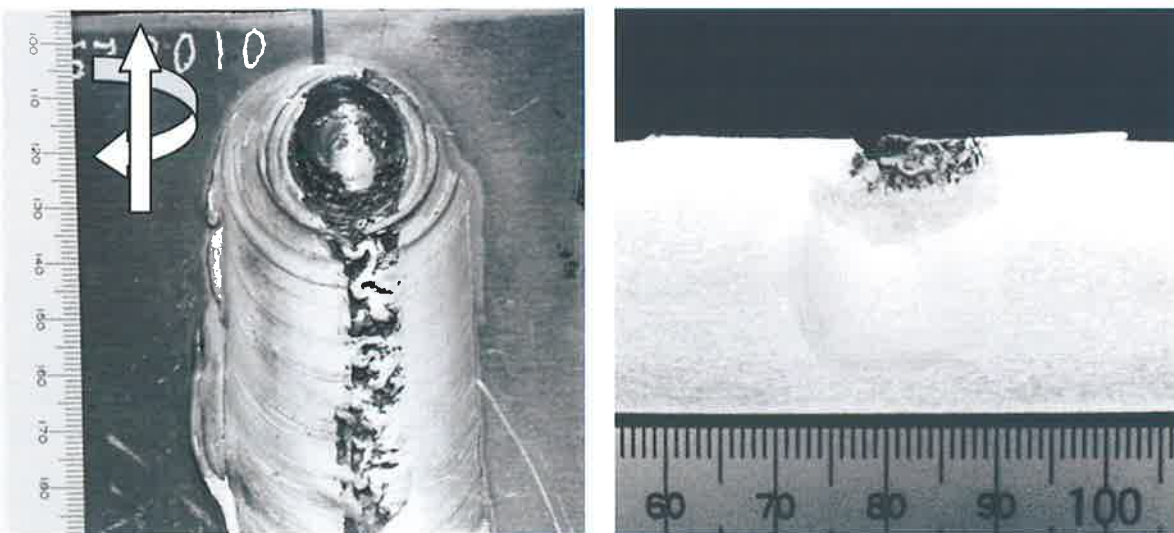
Weld 625B top view left and weld macrograph right demonstrating the surface breaking defect.
